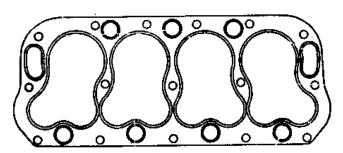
Cylinder-head gasket for four-cylinder engine.
